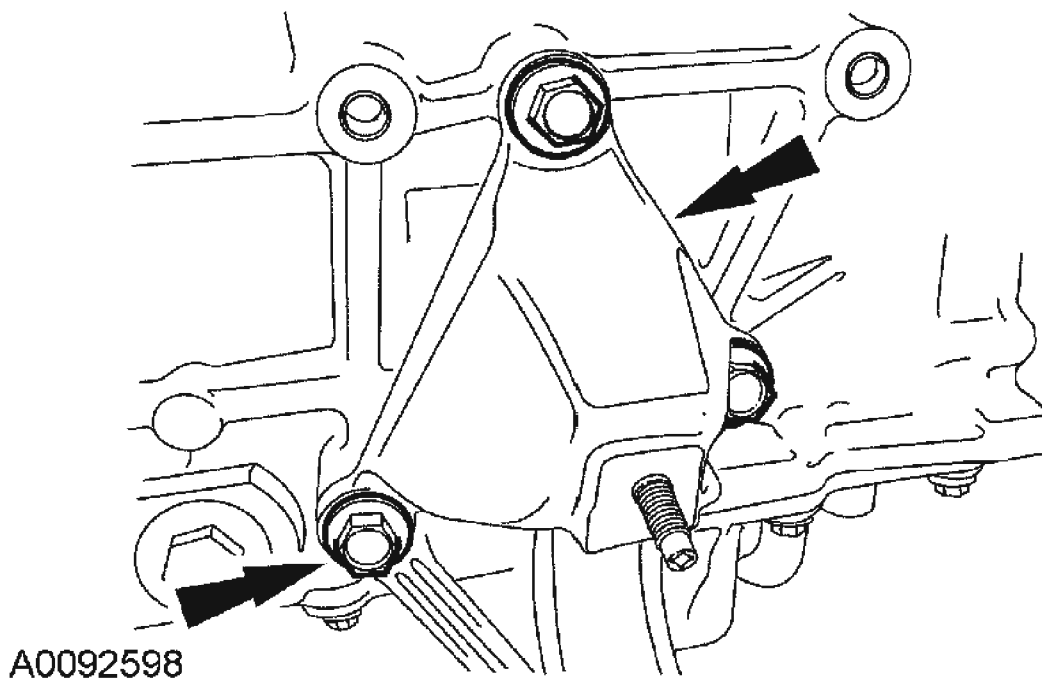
Removing Intermediate Shaft Bearing Bracket Bolts
